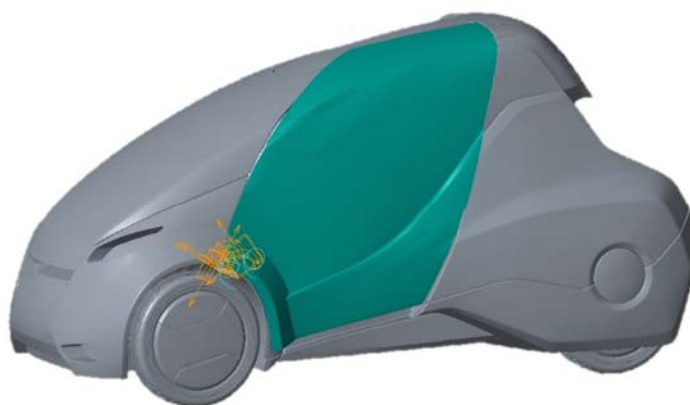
View on kinematic assembly including vehicle bodywork
